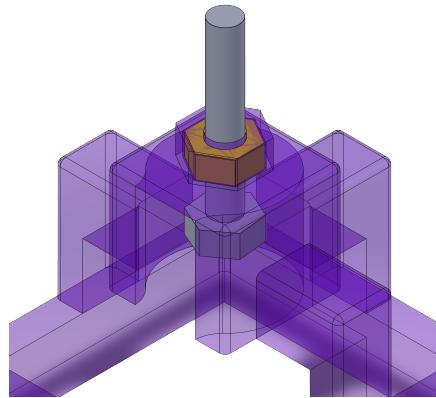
Sensor mount base see-through view of the nut and bolt mechanism.
